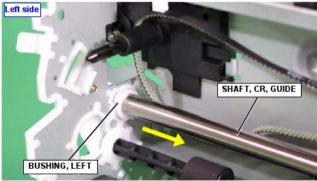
SHAFT, CR, GUIDE Removal 1
